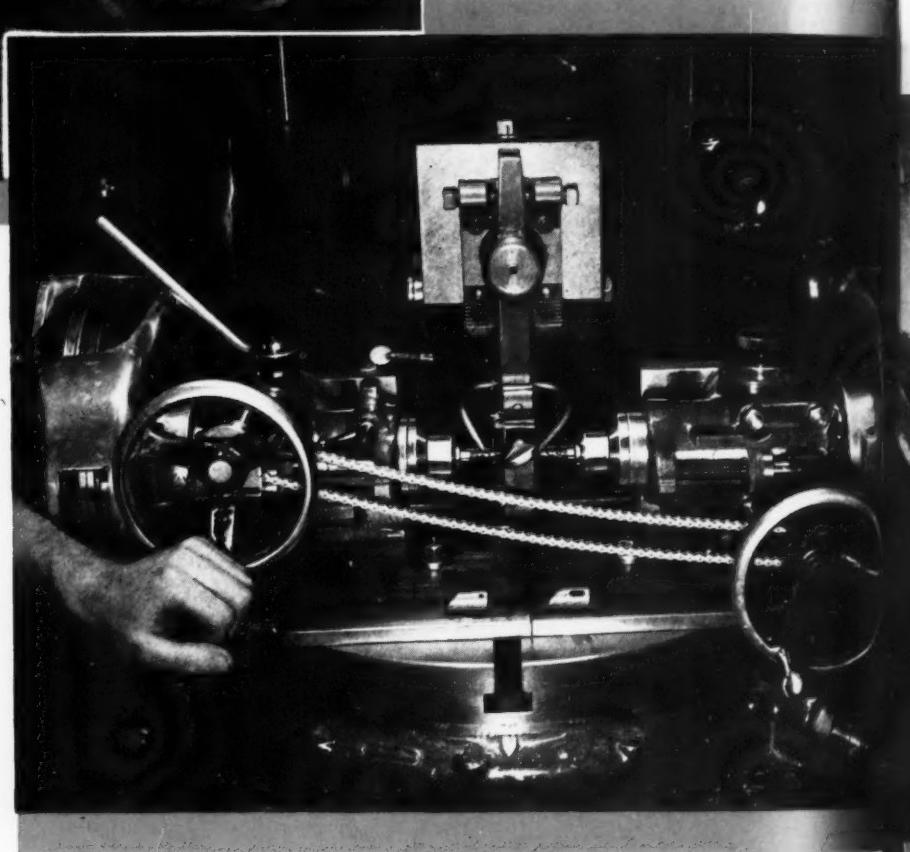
Ingenious Use of Two Milling Heads on Slotting Machine for Elongating a Hole in Small Steel Cams to Produce a Slot. Unfinished Piece is Shown at Left, and Finished Piece at Right
